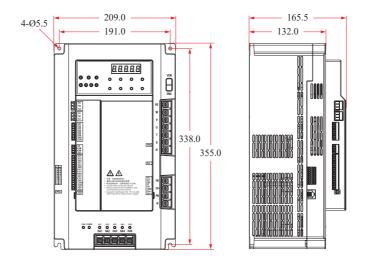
Dimensions of 11 – 15 kW model (mm)
